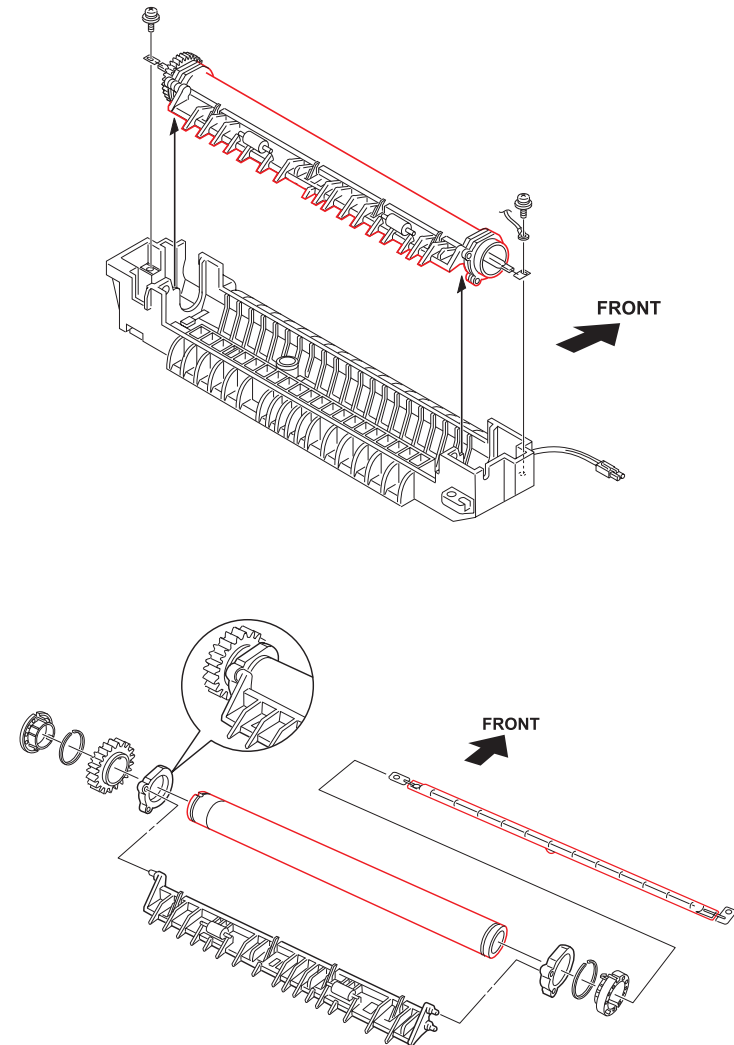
"Roll-Fuser / Heater Quartz" Removal
